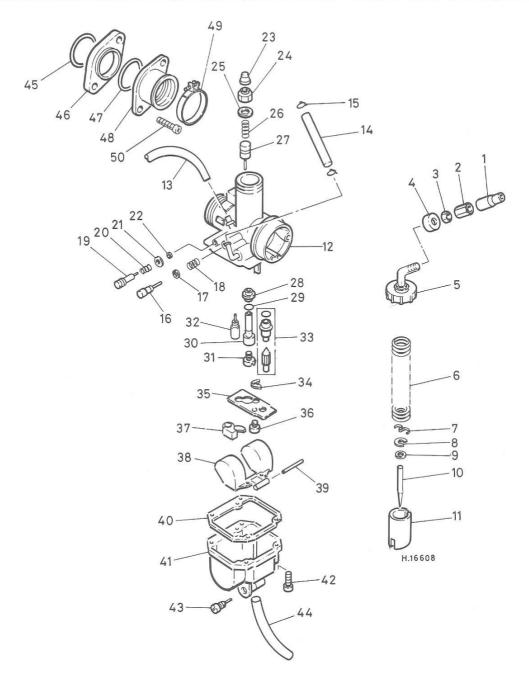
Carburetor - KLT160 (Sec 8)
